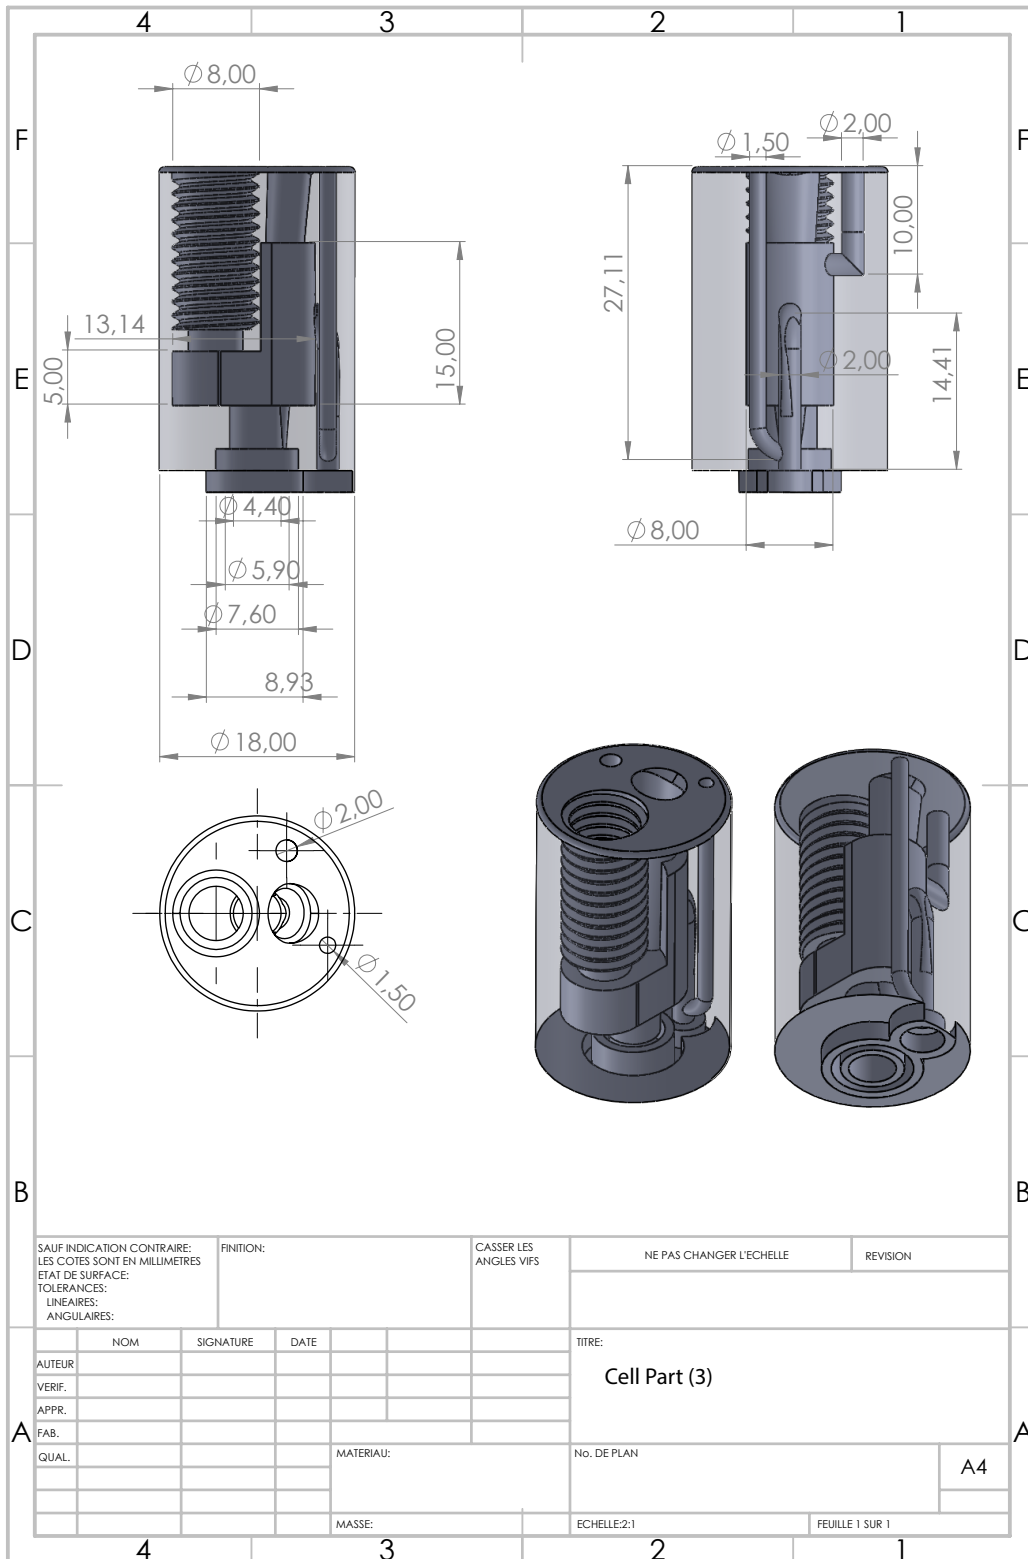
Drawing of the lower part of the mini redox-flow battery, to be plugged on a Bruker Micro-5 probe basis. The dimensions are in millimeters.
